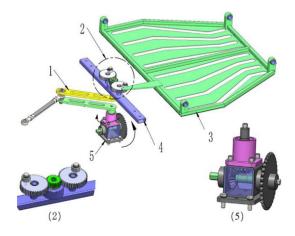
Transmission mechanism. 1. manipulator reciprocating mechanism; 2. gear train; 3. seedling guide; 4. support frame; 5. transmission case.
